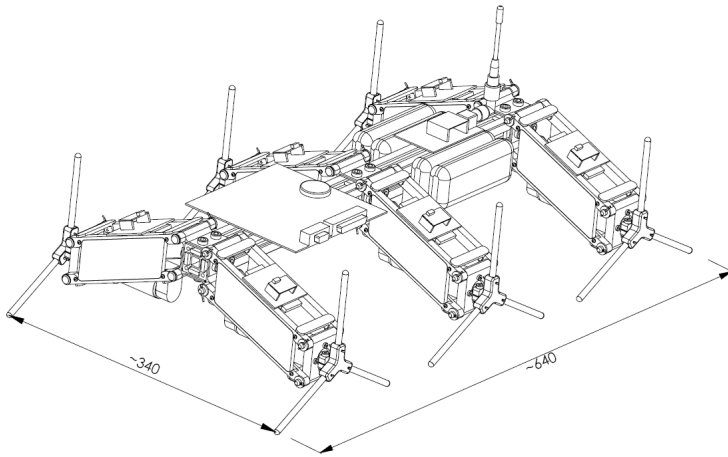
CAD of the TU Ilmenau Rotating Leg Vehicle [10]
